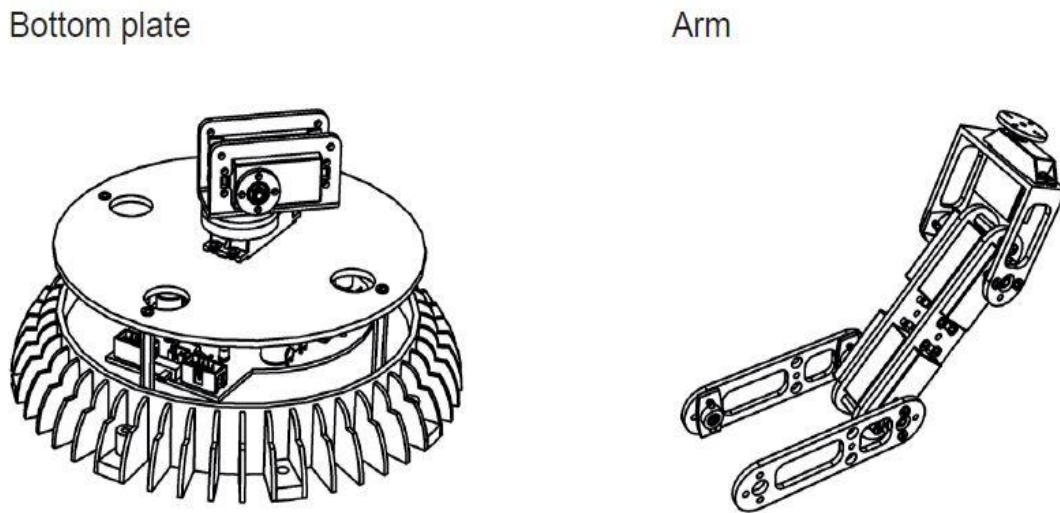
Assembly of the Baseplate(left) and Assembly of the Arm(Right)
